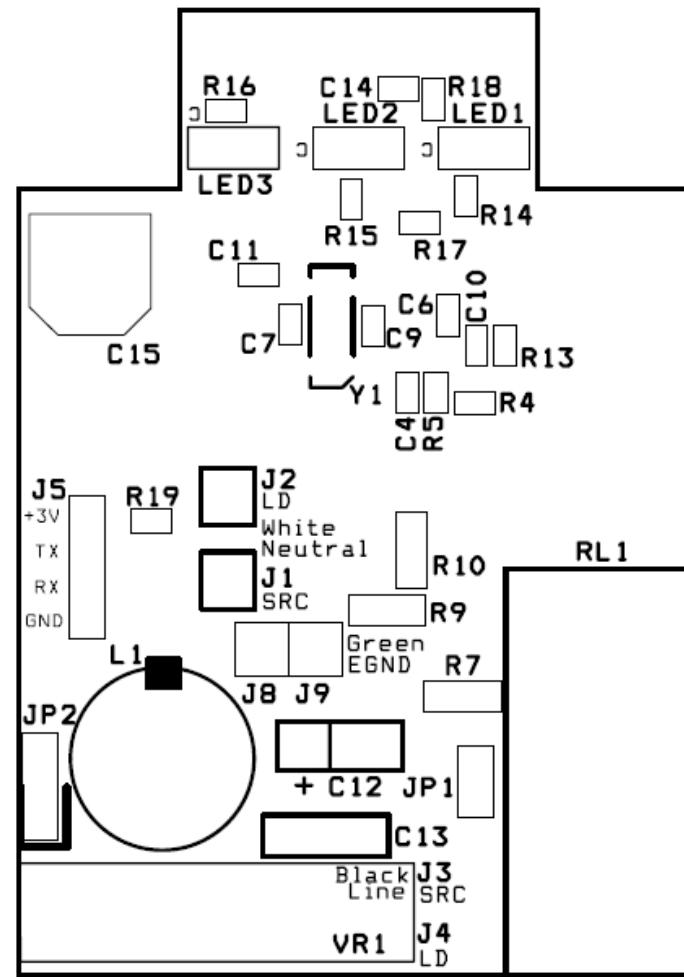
78M6612 Evaluation Board PCB Bottom View
